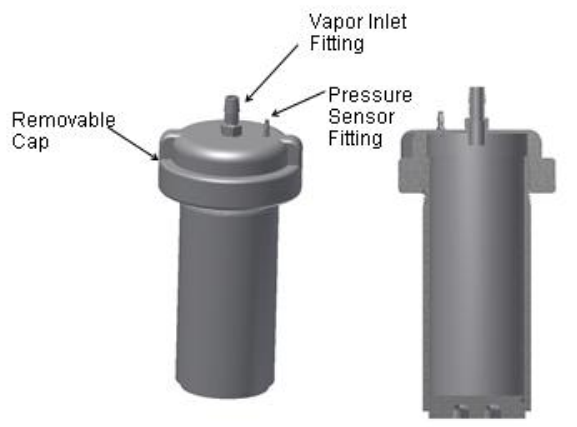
Cold trap canister with removable cap. Assembly consisted of a 3 inch diameter aluminum tube with a screw lid and open at the bottom.
